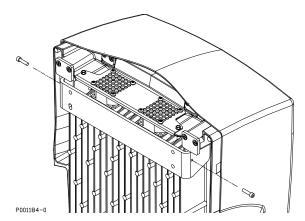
Fastening the SUNWAY M XS to the wall-mounting bracket
